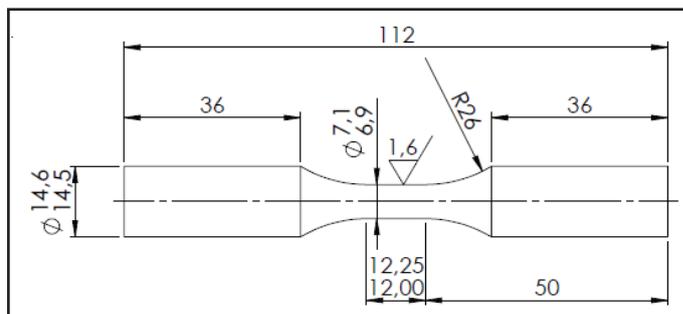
Dimensions of Test Specimens, in Millimeters.
